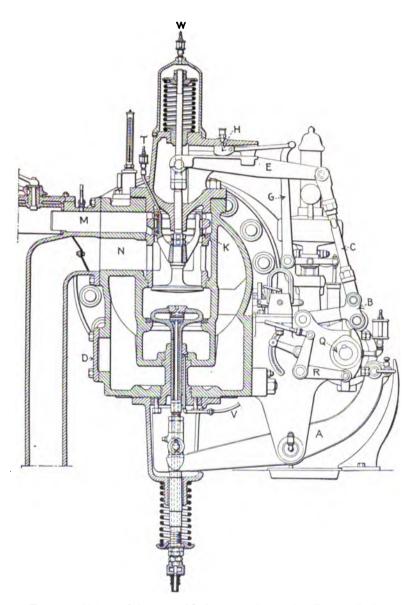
Valve and Governor Mechanism. Seager Gas Engine Works.
